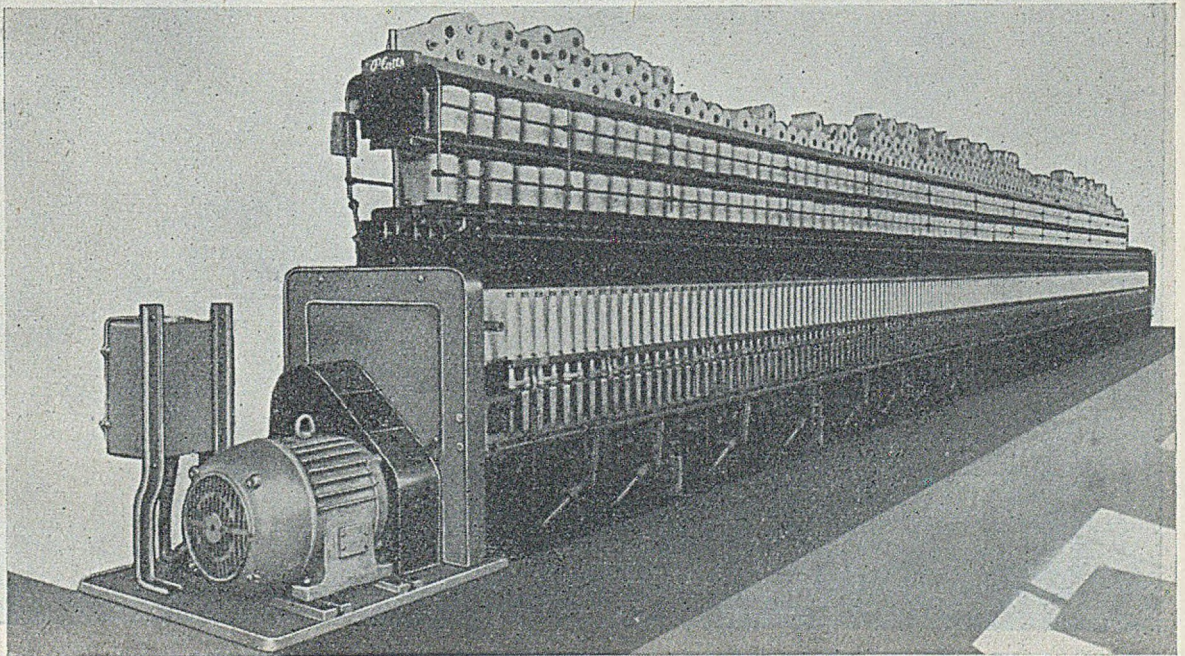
Ring Spinning Frame, which winds the Thread on to a Spindle or Paper Tube.
